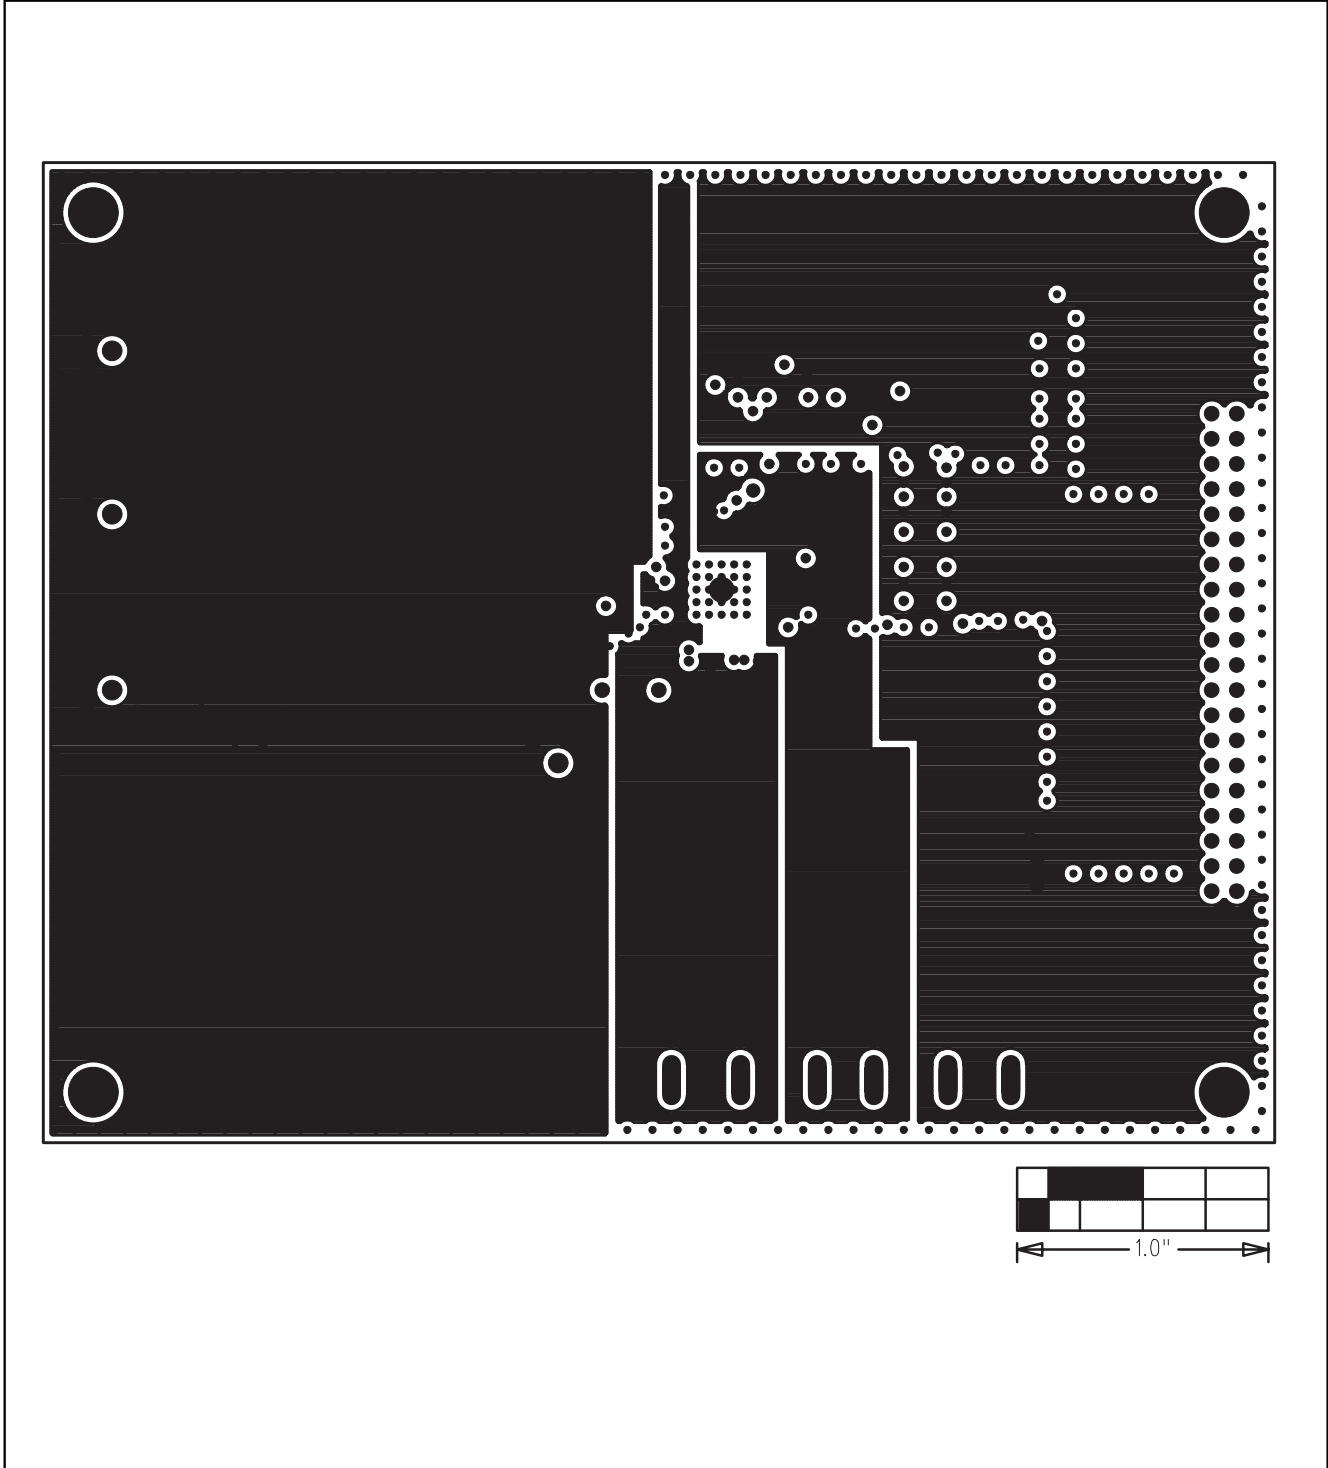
MAX1427 EV Kit PC Board Layout—Layer 3
